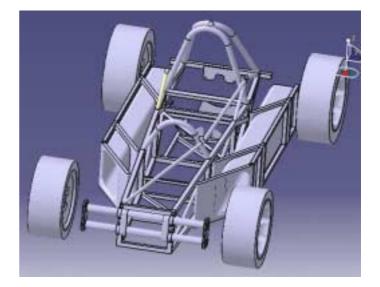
FV 2000 chassis design incorporating a safer nose structure.
